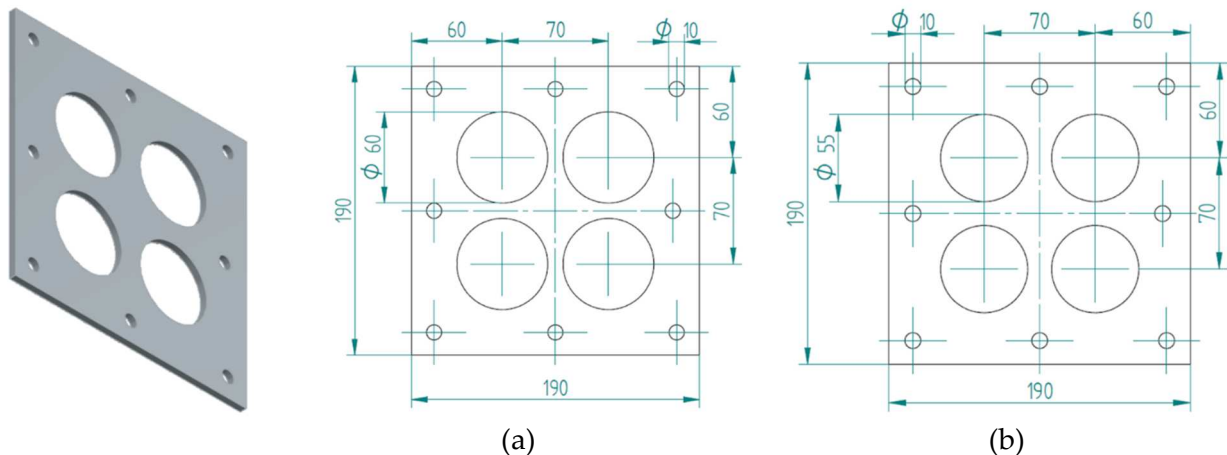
Clamping (a) and Backing (b) plates designed to carry out experimental SPIF test.
